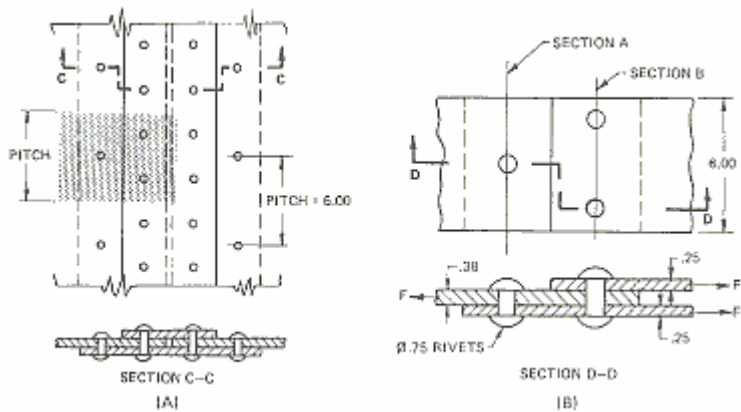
Double-riveted butt joint on a boiler.
